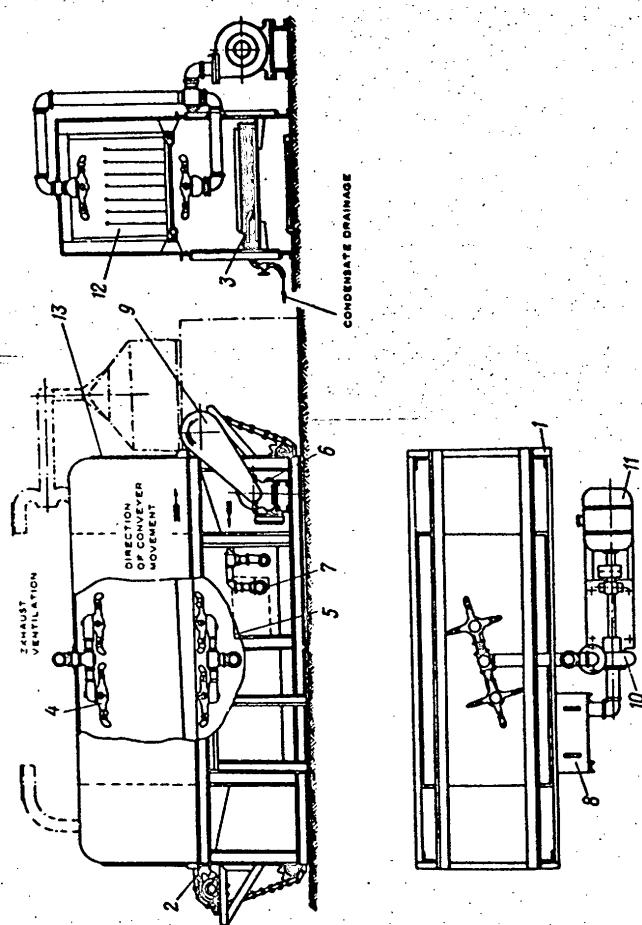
EQUIPMENT, ENGINE PARTS, FOR FLUSHING PANTS
